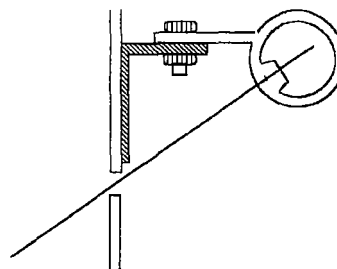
Thermostat/Thermometer Phial Assembly
